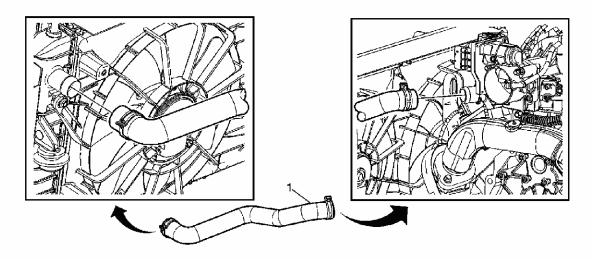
View Of Radiator Inlet Hose (L26) Courtesy of GENERAL MOTORS CORP.
